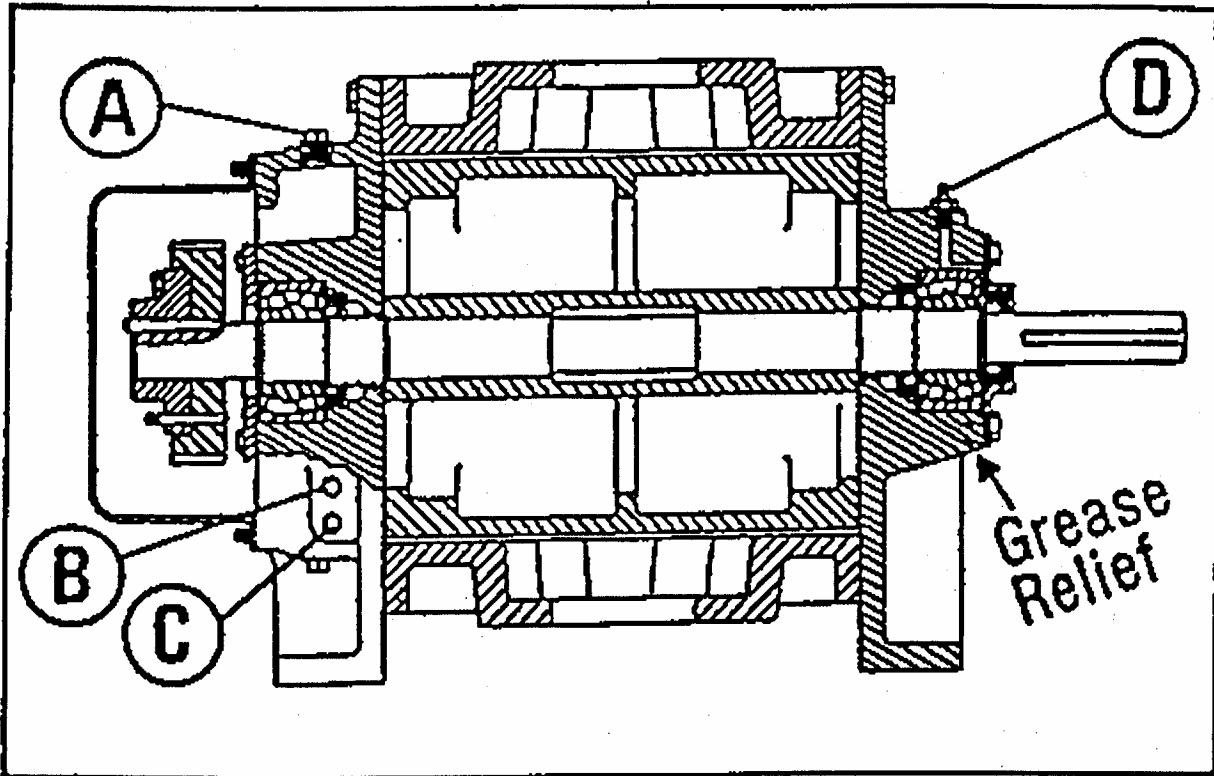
EXHAUST STACK VACUUM PUMPS - LUBRICATION PLUGS
